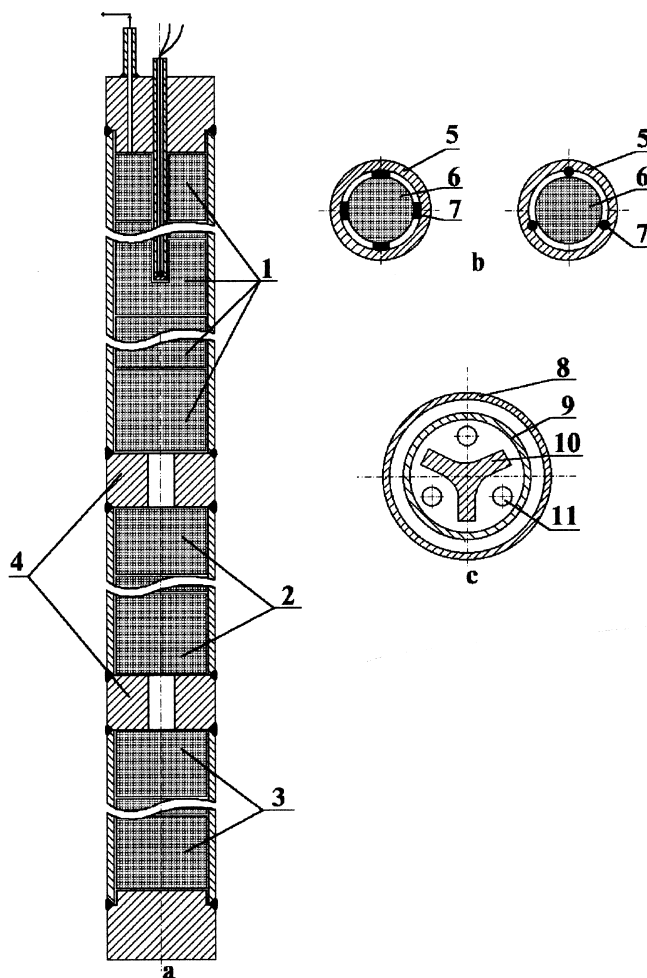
Unit for reactor irradiation of ceramic pellets (a) ampoule, (b) cross-section of ampoule, (c) cross-section of assembly. 1,2,3 – ceramic pellets; 4 – dividing disk; 5 – shell of the ampoule; 6 – pellet; 7 – spacer strip; 8,9 – inside and outside tubes of the assembly; 10 – load carrying support; 11 – ampoule.
